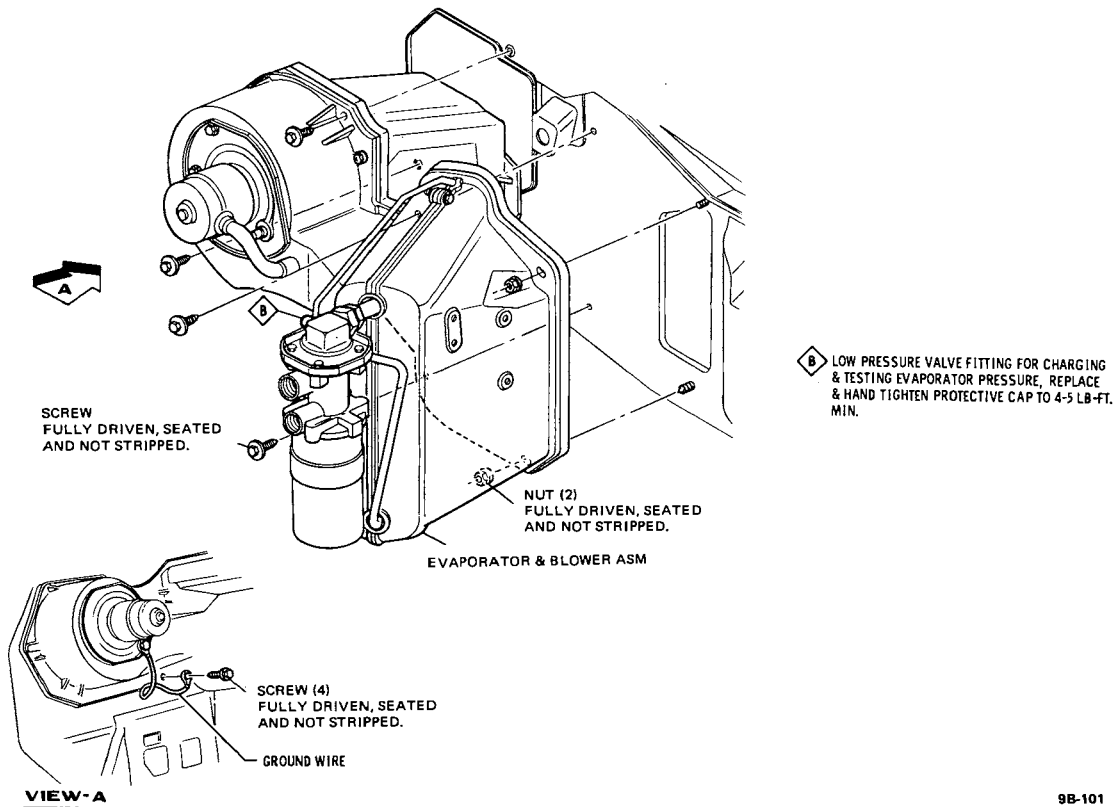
B-151 - Evaporator and Blower Assembly - B-C-E Series
